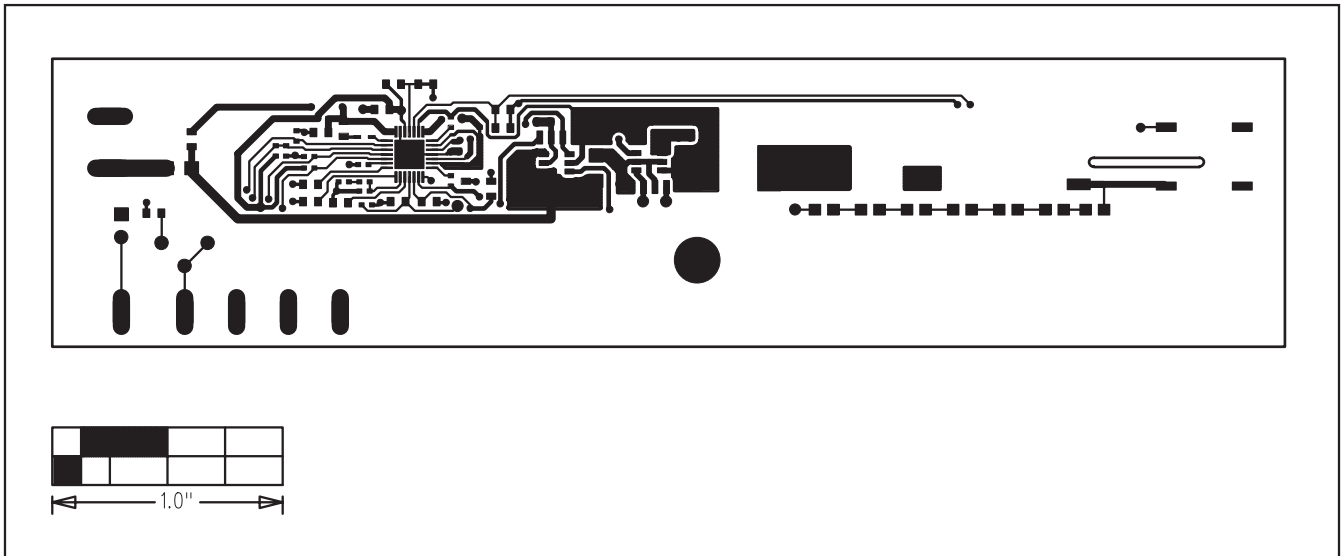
MAX8785A EV Kit PCB Layout—Component Side
